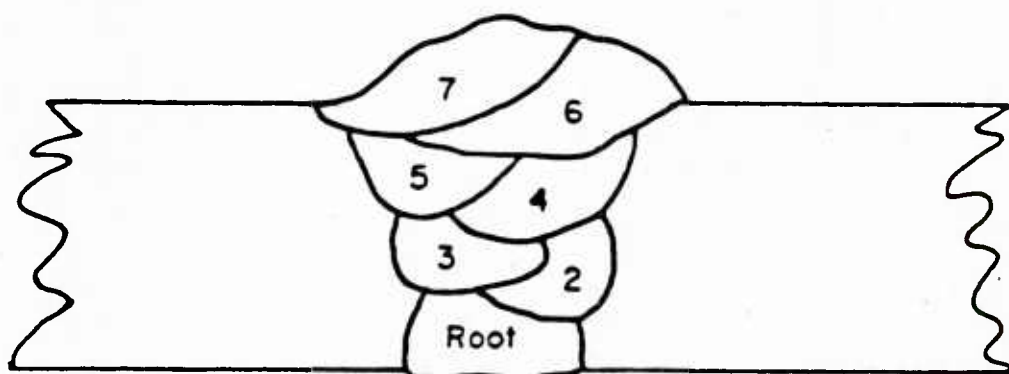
CROSS SECTION OF A SEVEN-PASS GIRTH-BUTT WELD
